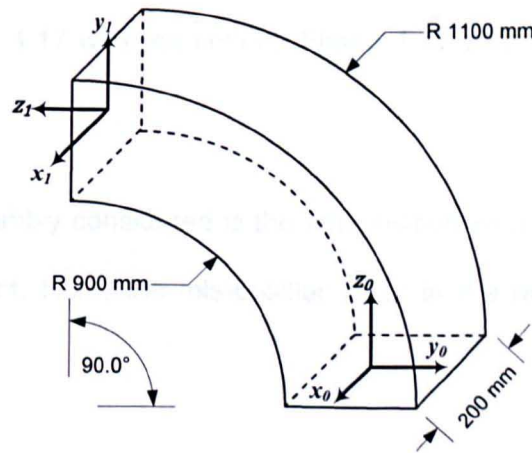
Nominal dimensions of 3D uniformly segmented circular component.
